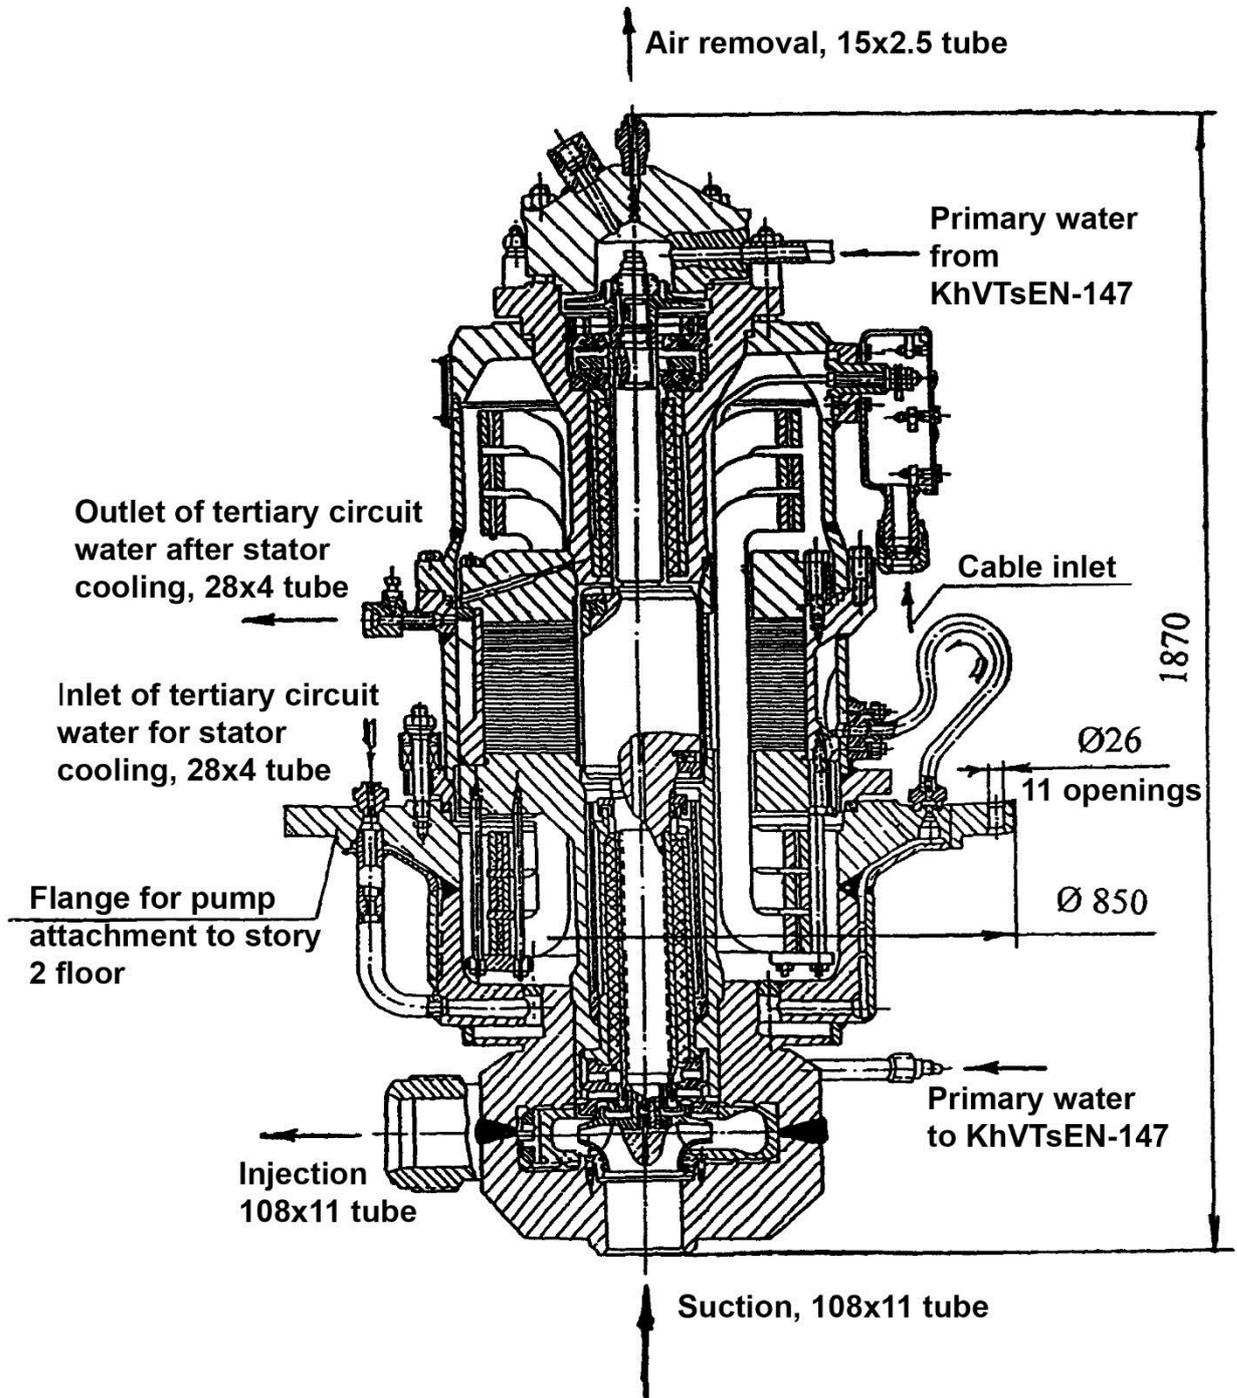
Auxiliary reactor coolant VTsEN-147P pump
